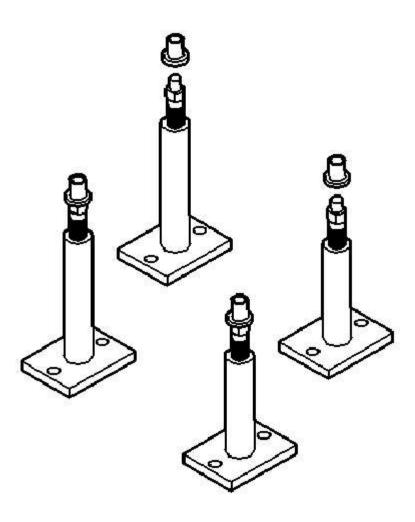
Post Kit Engine Cradle 6848 Courtesy of CHRYSLER LLC
